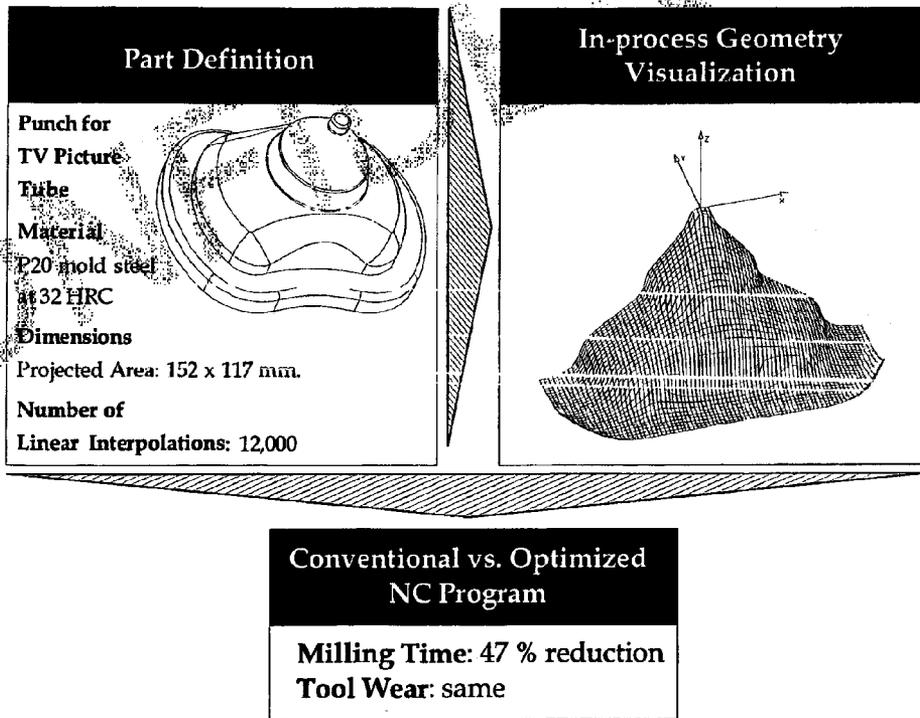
Picture Tube Die Machined with Program Optimized by Optimill
